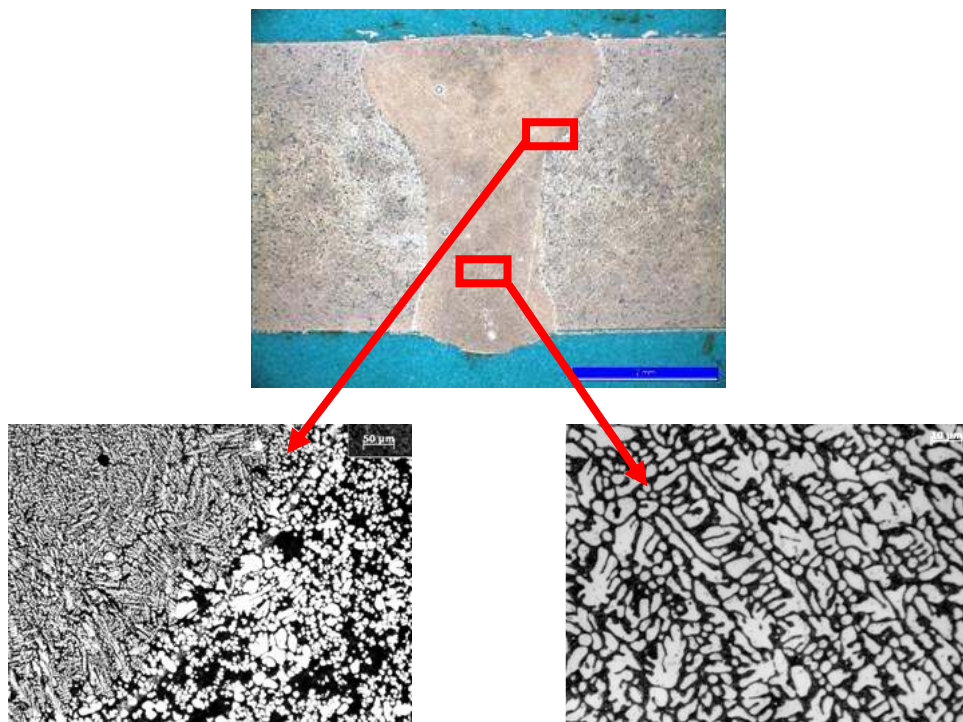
EBW welding seam on a 4 mm wall-thick plate in Castasil[®]-37.
